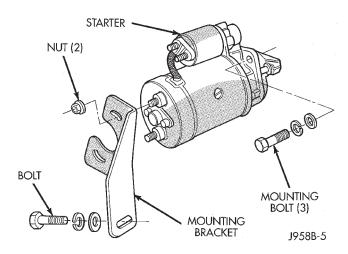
Starter Mounting - 2.5L Diesel Engine
